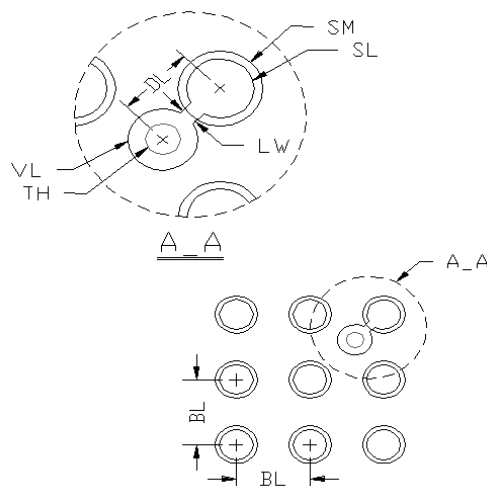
• Suggested Board Layout of Soldered Pads for CS281 CSPs (PCB Lower Layer)
